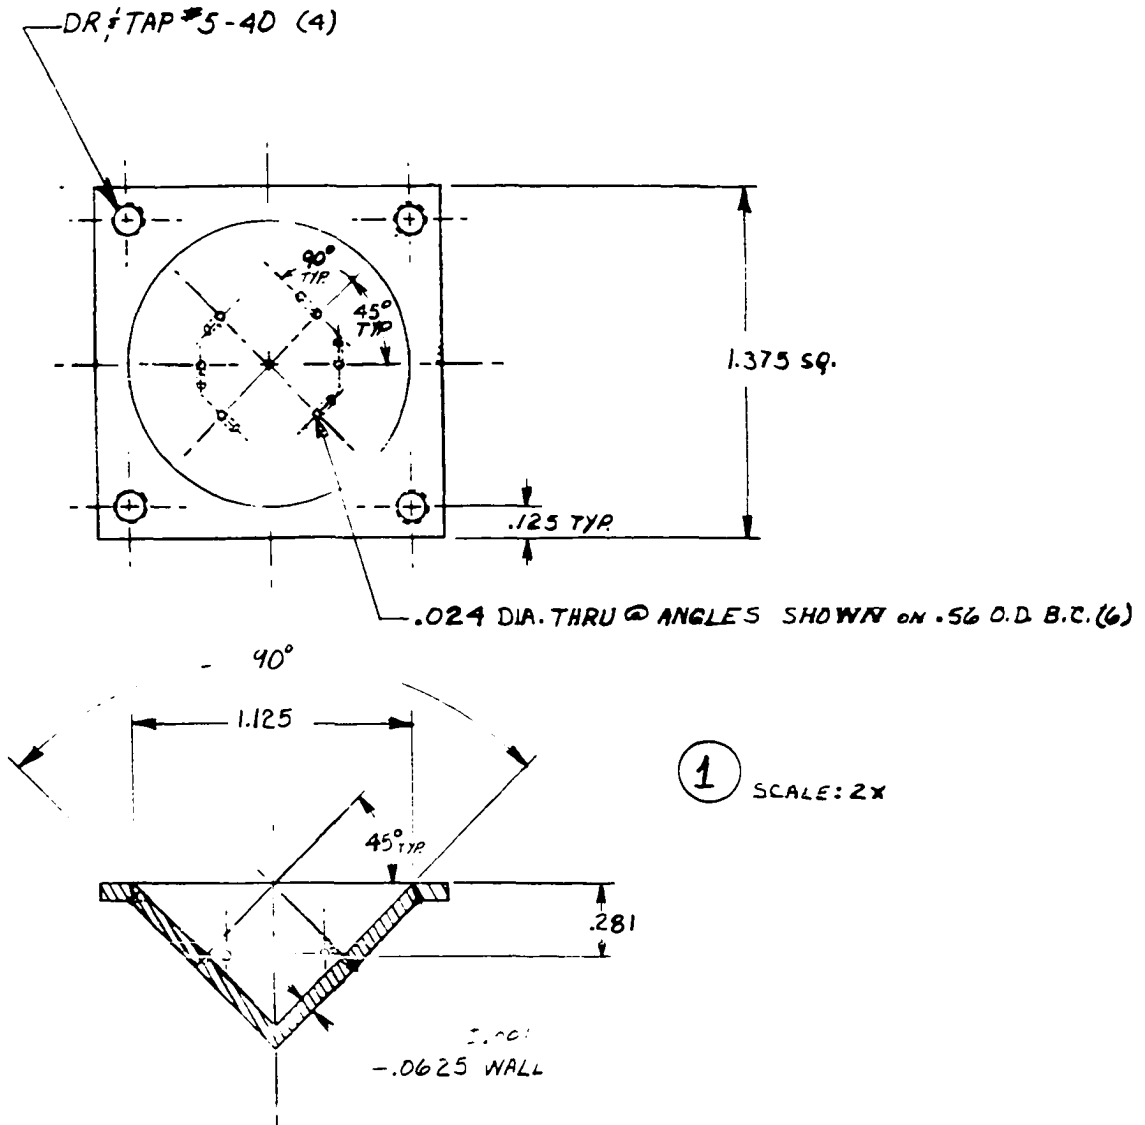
The stator design used to drive rotors at speeds of 3 kHz.
